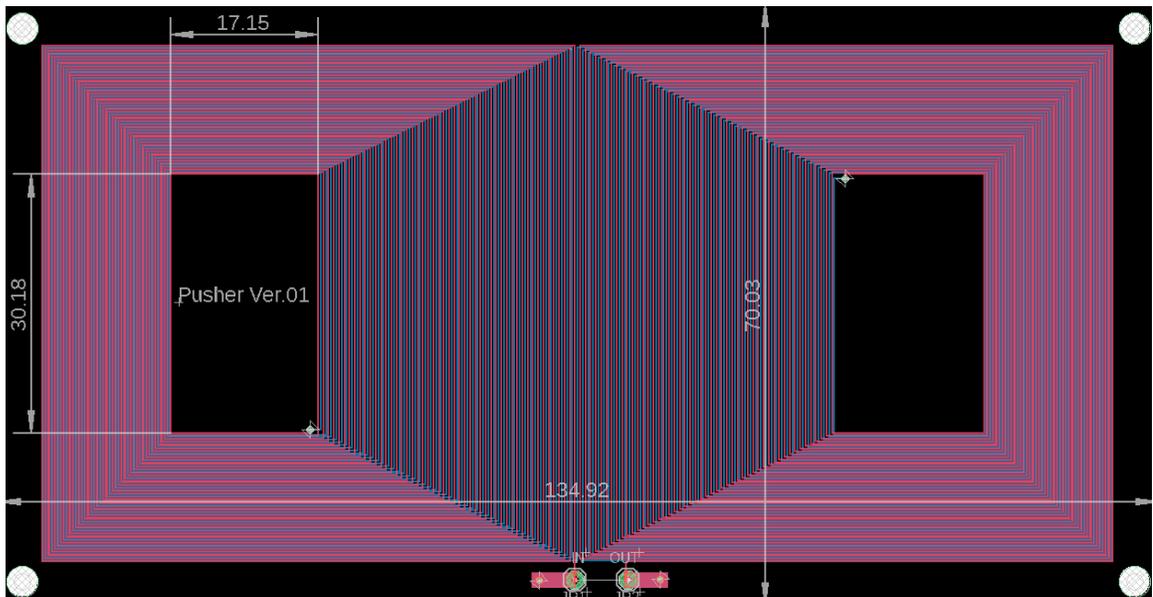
Sensing coil, Red-Top layer, Blue-Bottom layer
